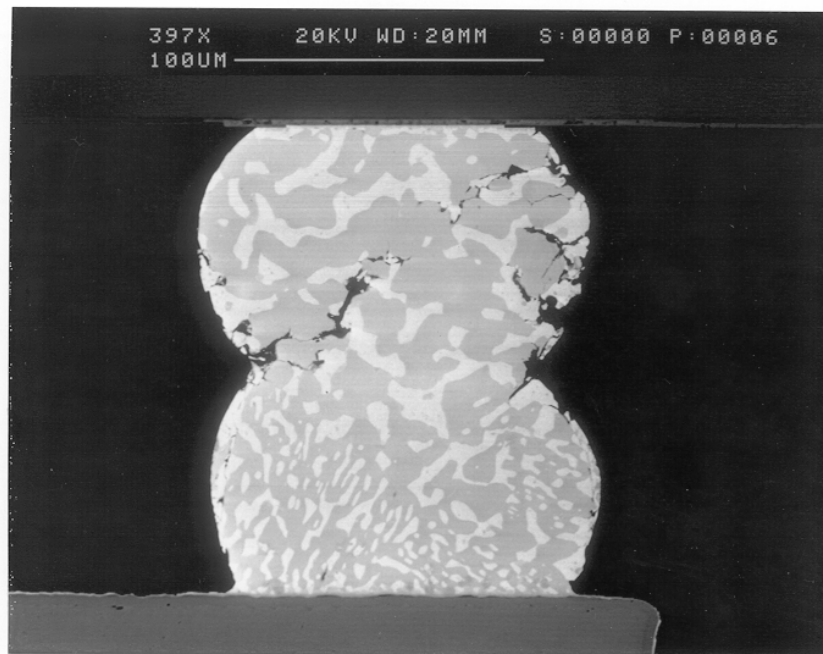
Cross-sectional picture of a failed double bumped die with a crack at the center neck of the solder joint
